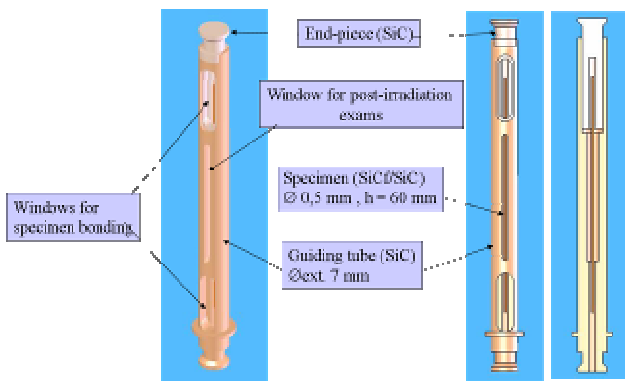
SiC housing of the SiC/SiC mini-composite. Top movable end-piece is hooked to a pneumatic loading unit (see next figure).
